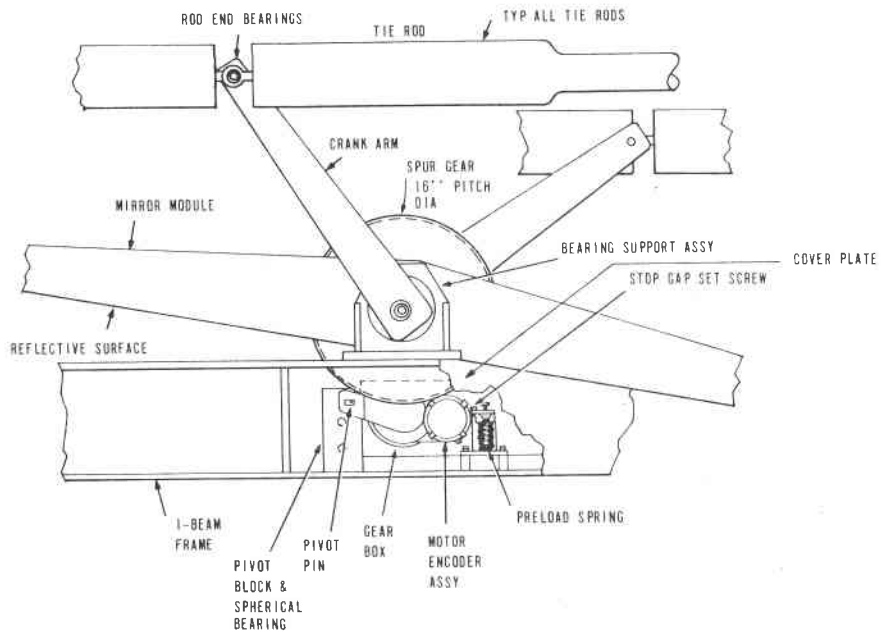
Heliostat Inner Axis Drive (Spur Gear Cover Removed for Clarity)
